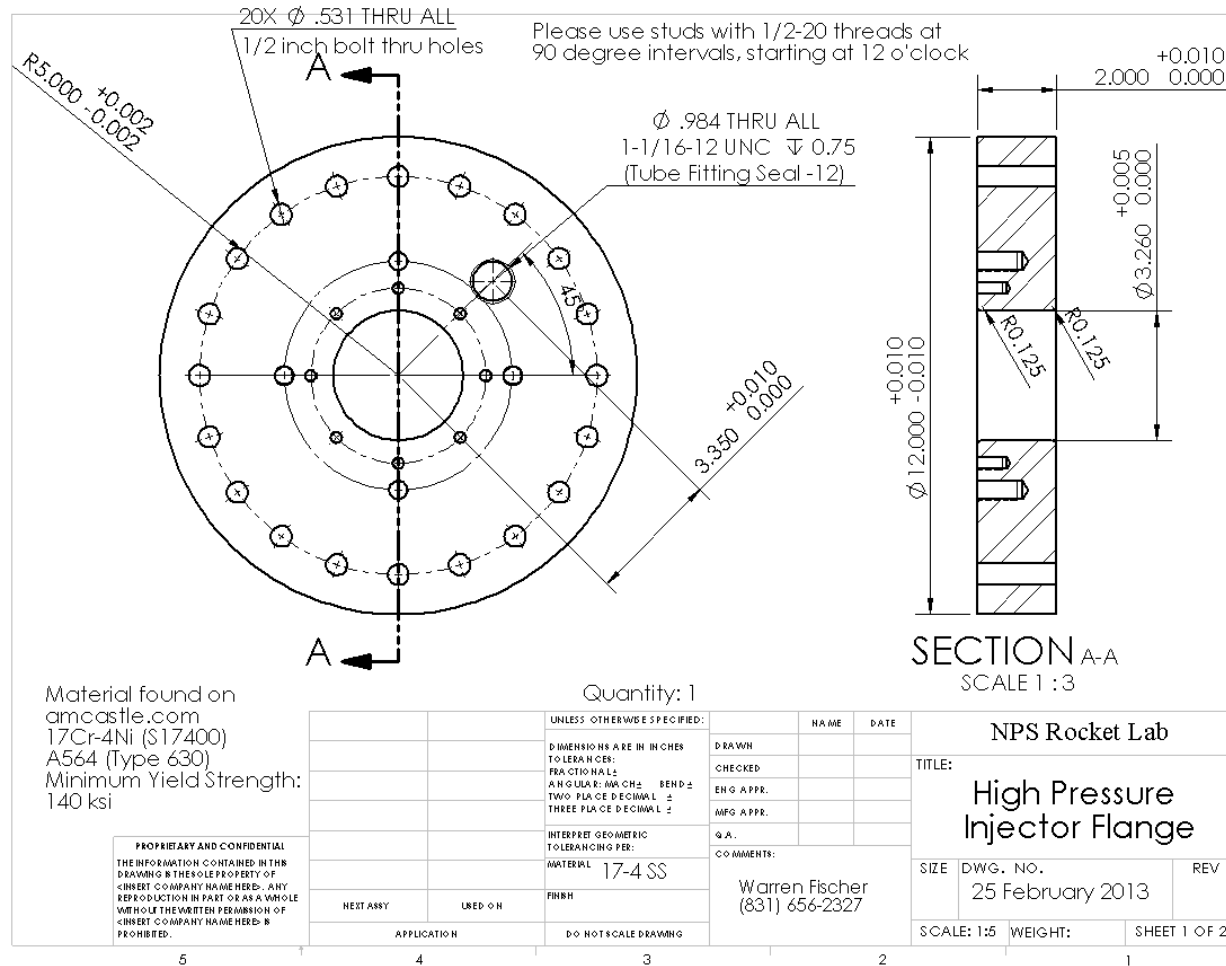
Injector Flange Fabrication Drawing (View 1 of 2)
